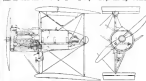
ENGINE MOUNTING IN THE HANDLEY PAGE W8 TWIN-ENGINE AIRPLANE.
